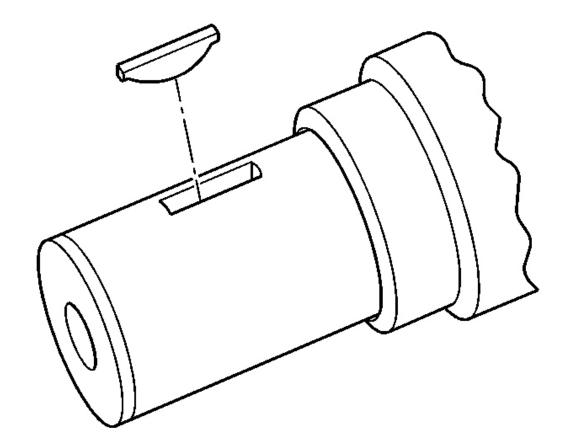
View Of Crankshaft Key & Keyway Courtesy of GENERAL MOTORS CORP.
